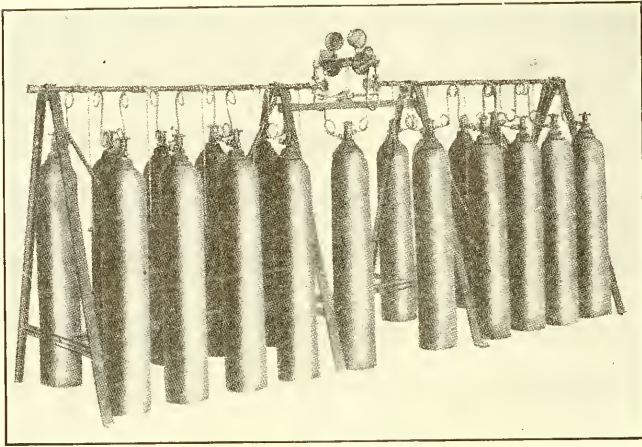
Oxweld Oxygen-Cylinder Manifolds.
